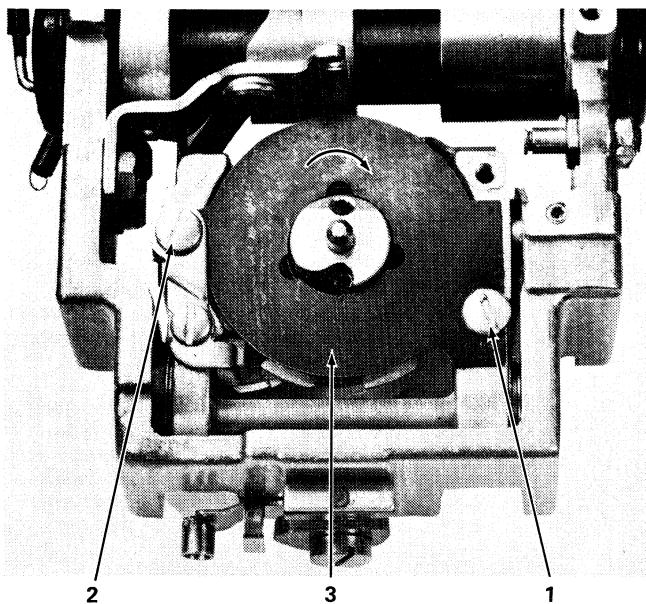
Rotate Spring Replacement (Bottom of Carrier)
